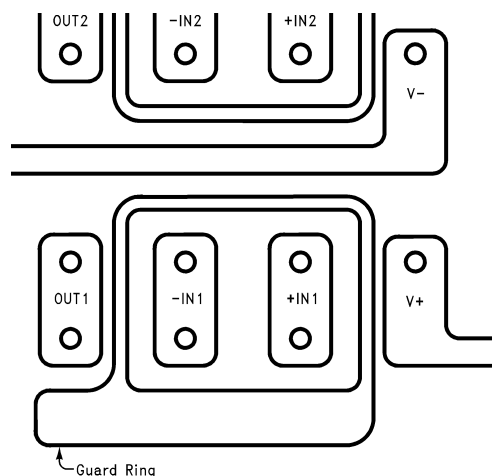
Example of Guard Ring in PCB Layout Typical Connections of Guard Rings
